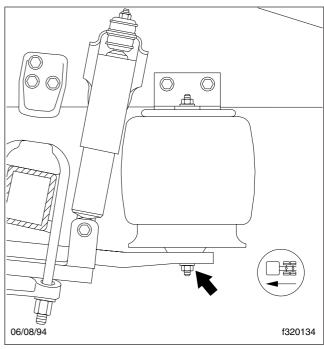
, Capscrew Connecting Leaf Spring and Air Spring
